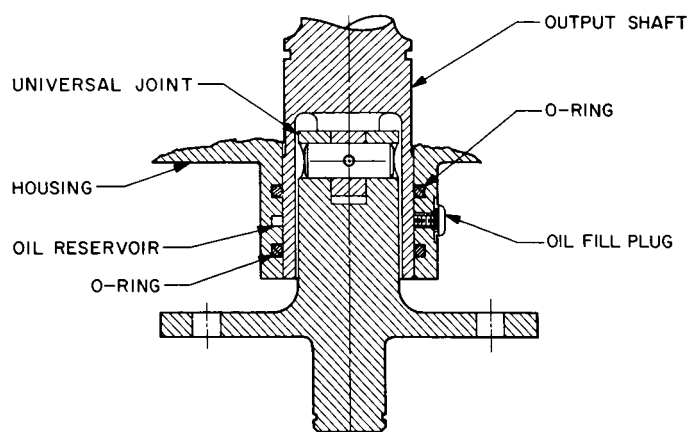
Output-shaft seal and universal joint for *Mariner II* scan mechanism
